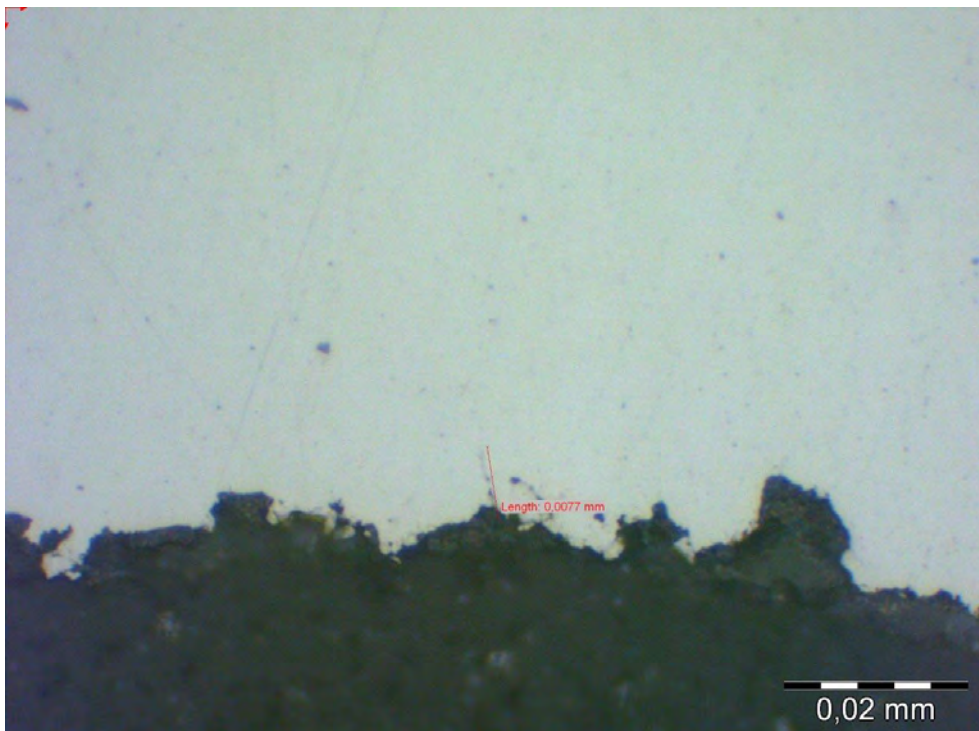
Cut one in crack at segment A, third ridge on barrel no. 14389
